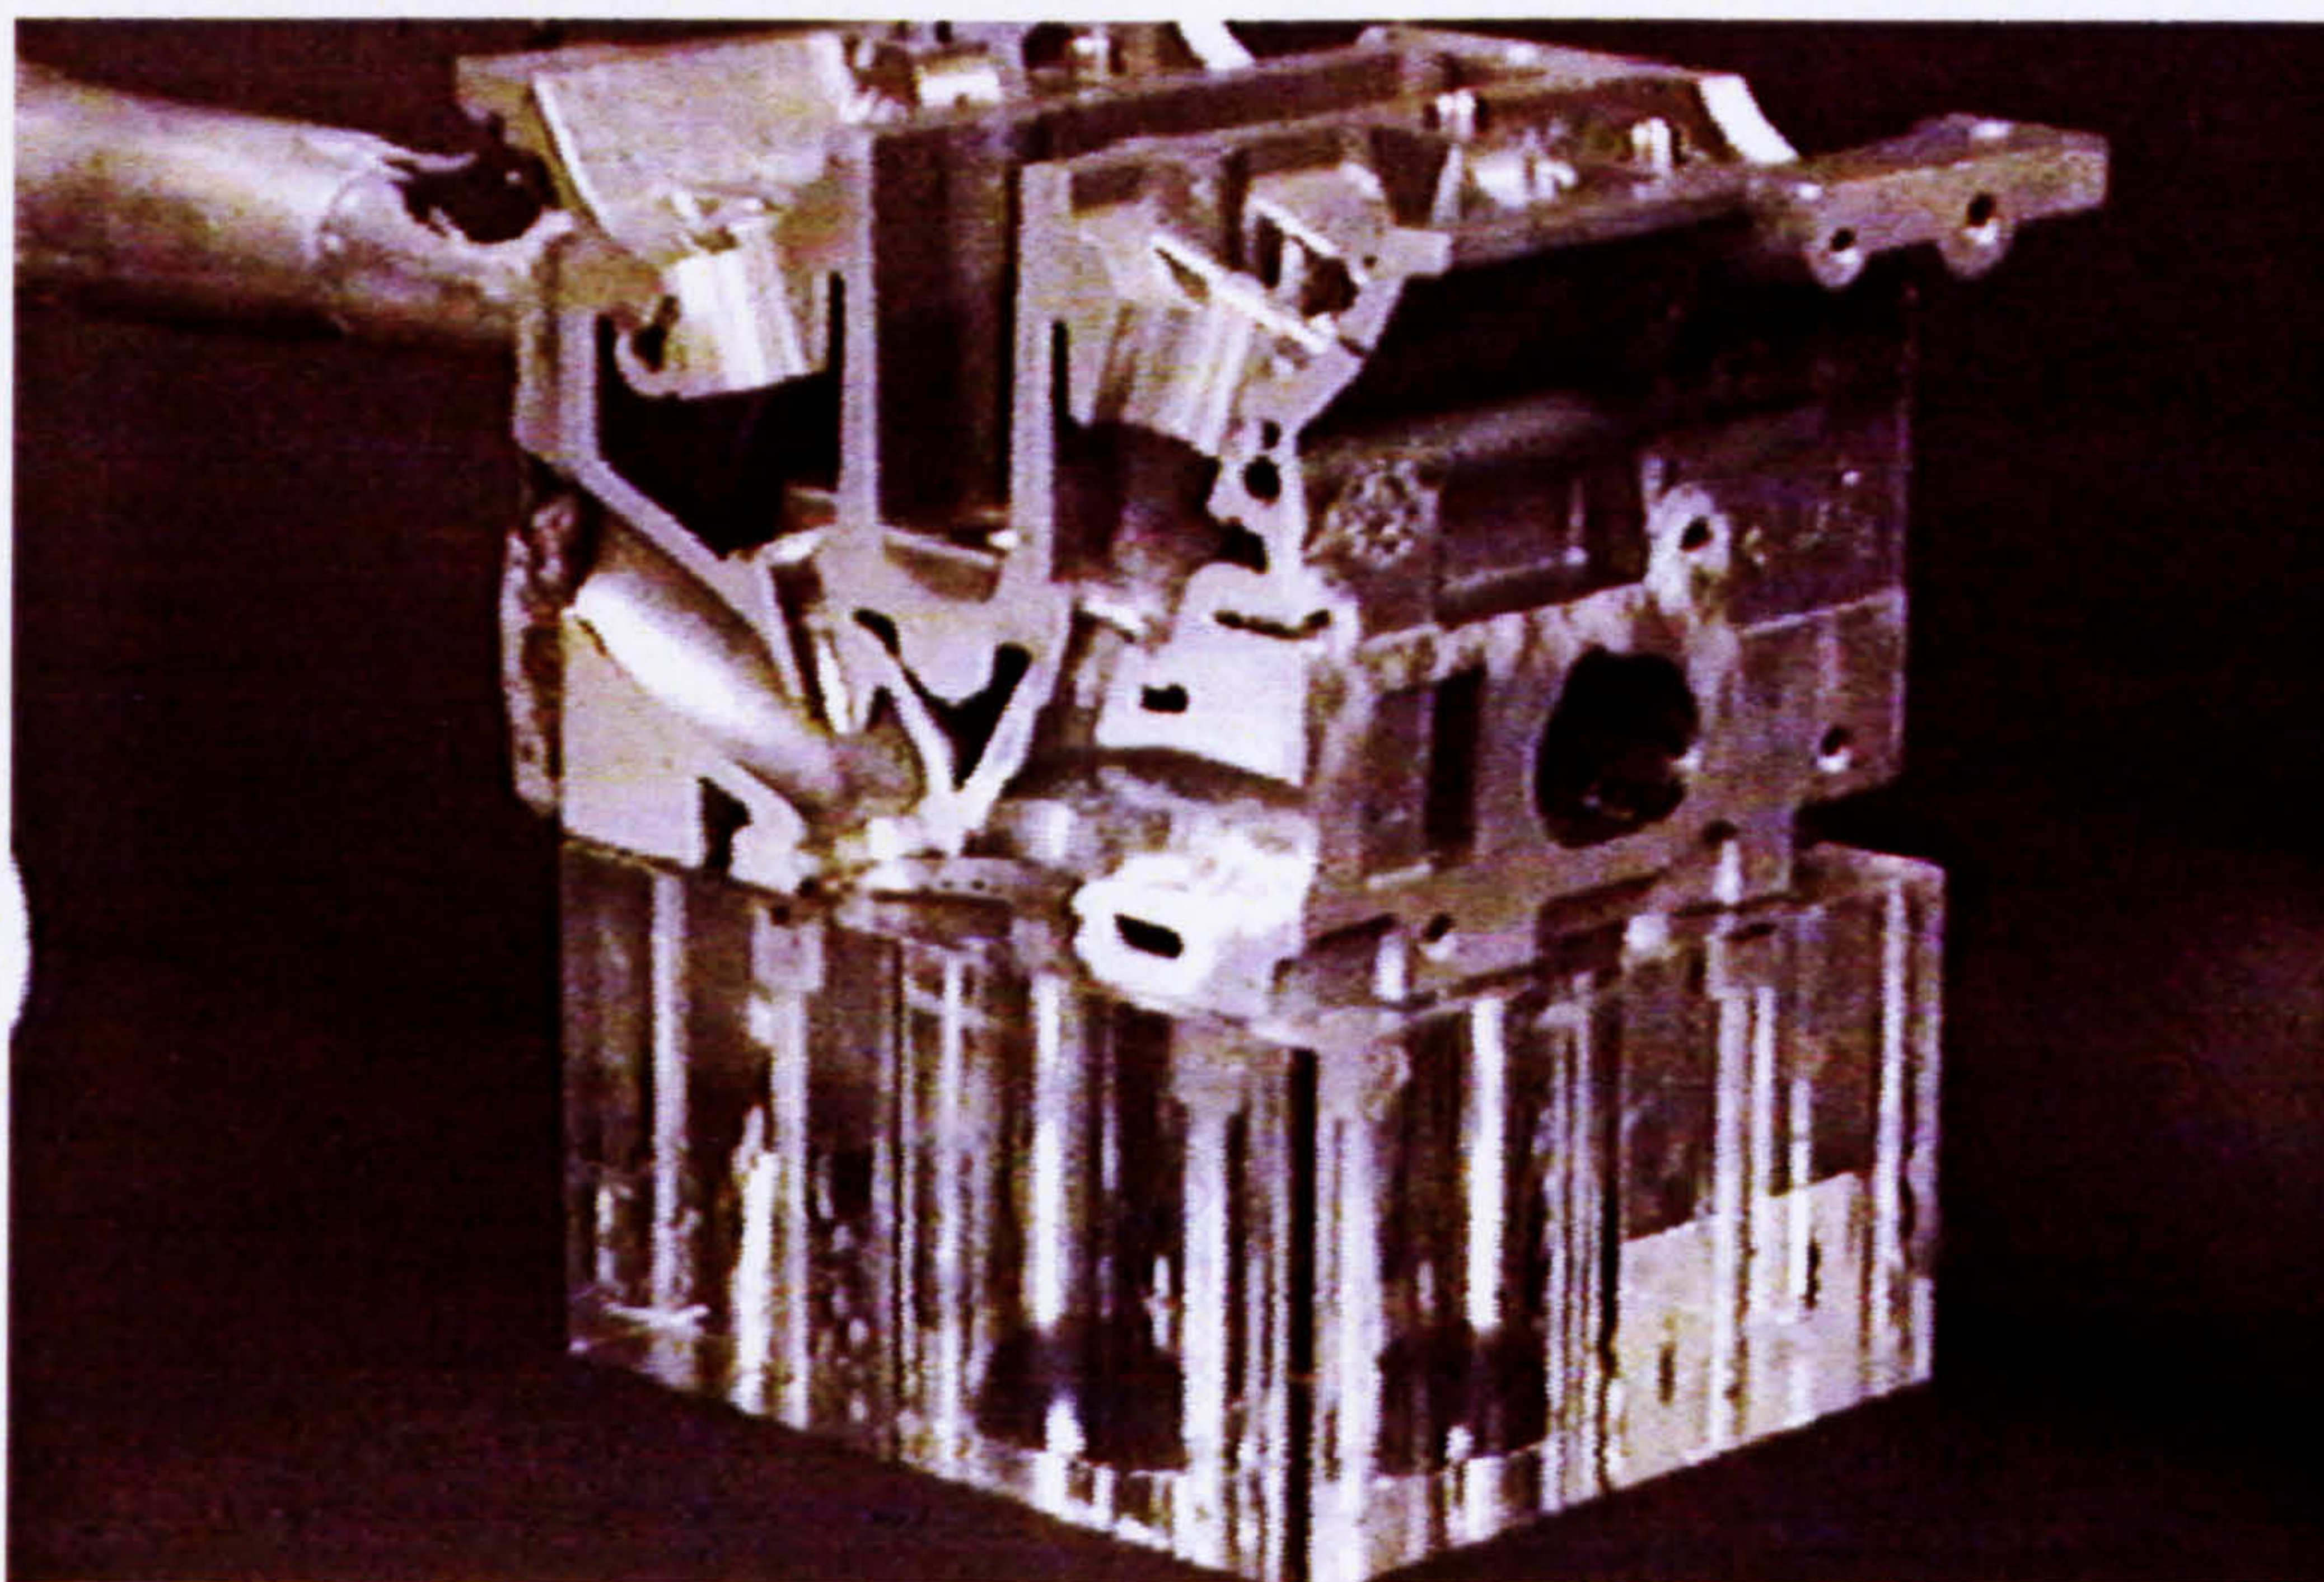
Engine model produced by mounting an aluminium cylinder head onto a Perspex cylinder block
